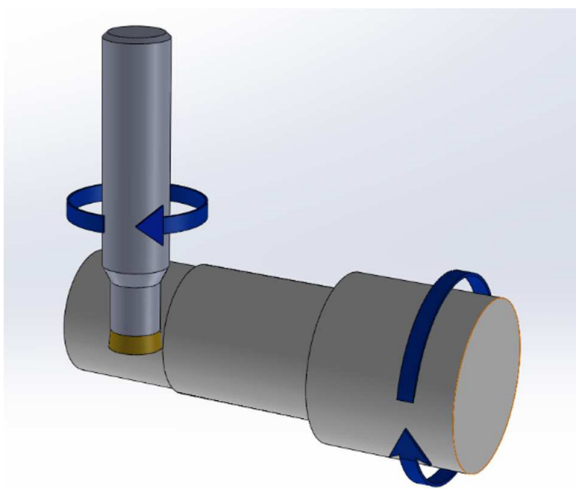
Unconventional tangential cutting scheme with simultaneously rotating tool and workpiece on a milling machine
